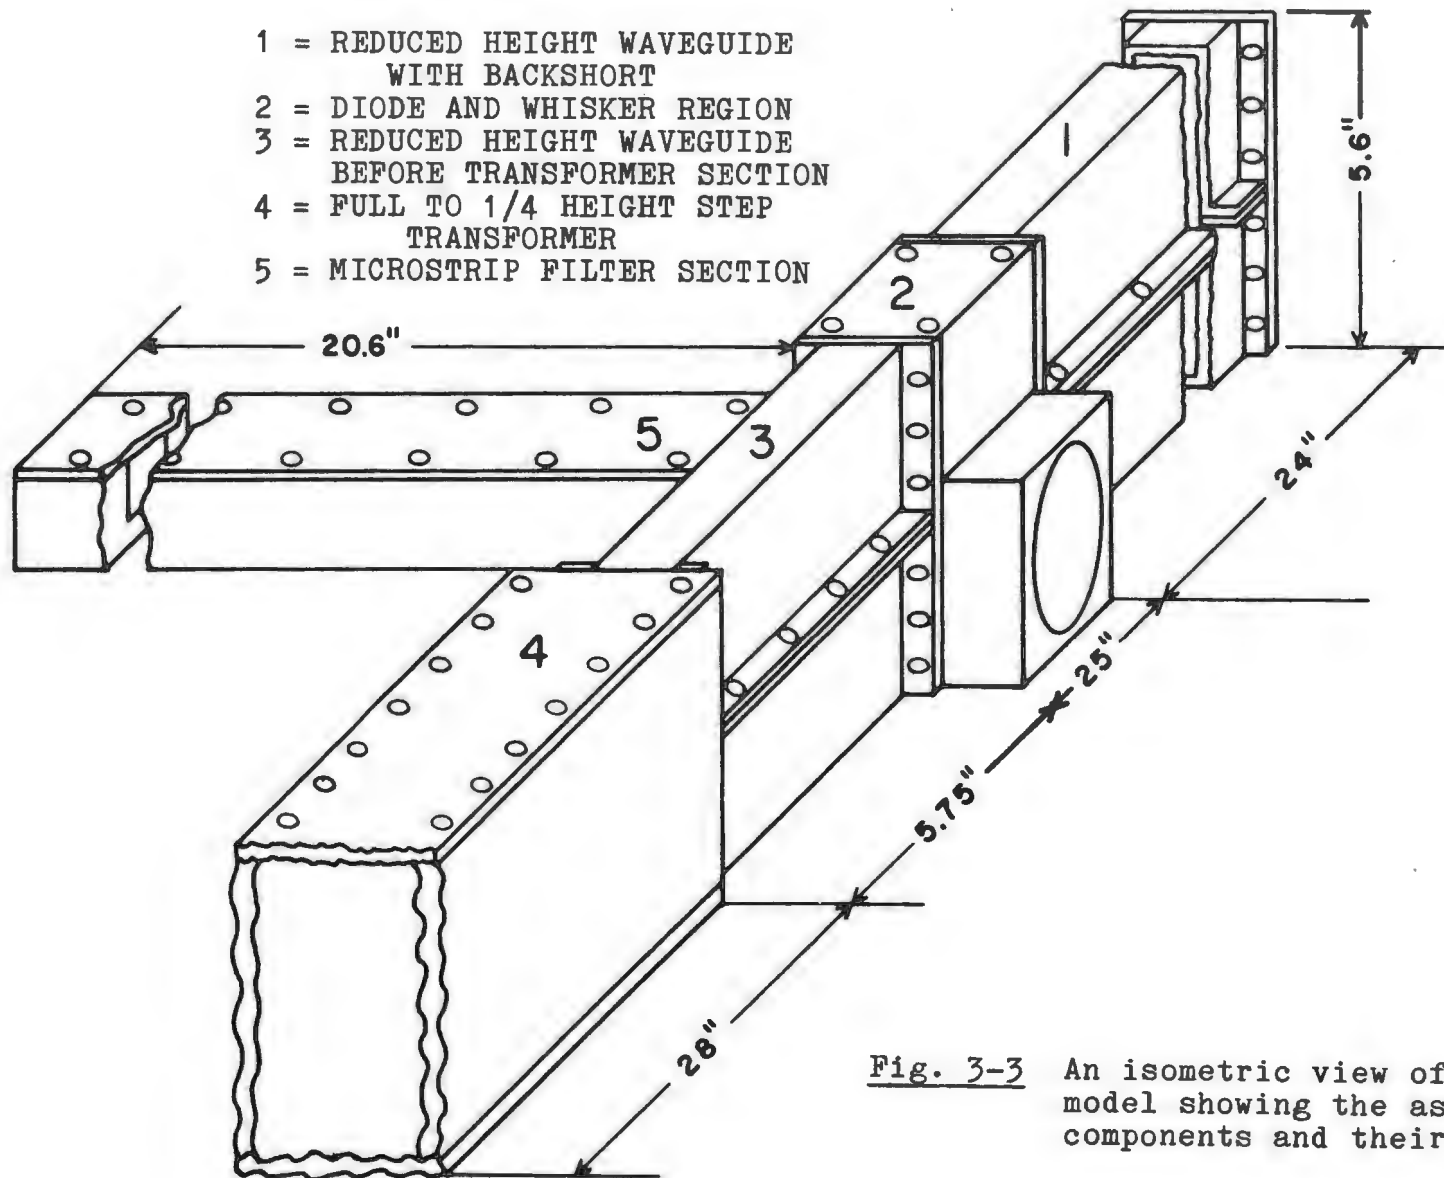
An isometric view of the mixer model showing the assembled components and their dimensions.
